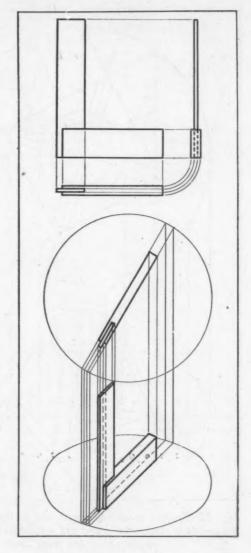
Right—How orthographic drawing of toolmaker's square is converted into threedimensional drawing
